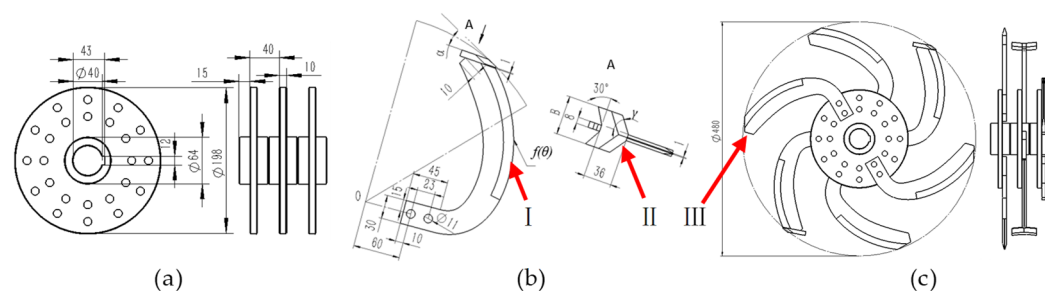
Design of wing-shaped blade set: (a) adjustable holding flange; (b) wing-shaped blade: I: side blade; II: tangent blade; (c) wing-shaped blade set: III: straight blade.
